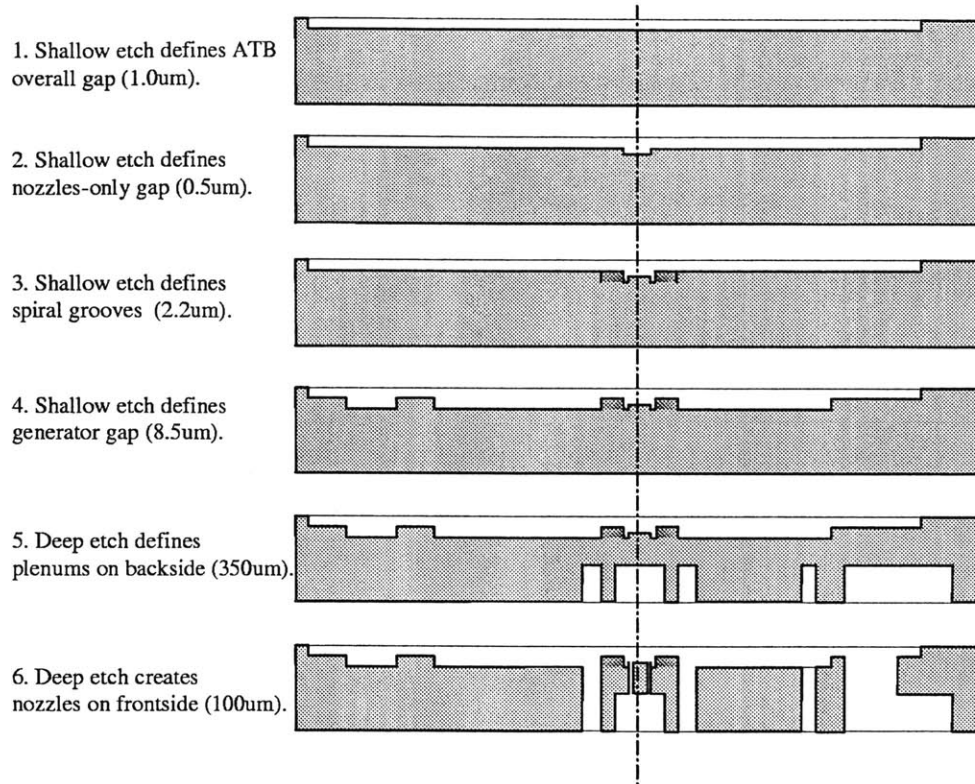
Fabrication process flow of Aft Thrust Bearing.
